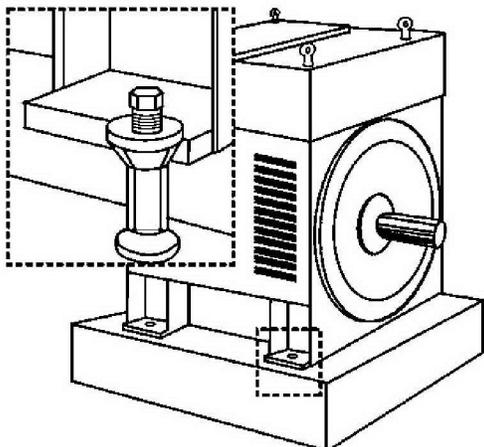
Motor mounted on a concrete base with foundations studs
